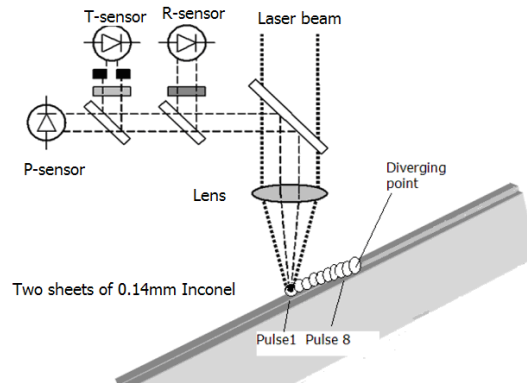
A schematic of the edge welding geometry for the 'faulty' weld. The weld begins on one workpiece only and then recovers its correct position before failing as a result of the gap between the workpieces.
